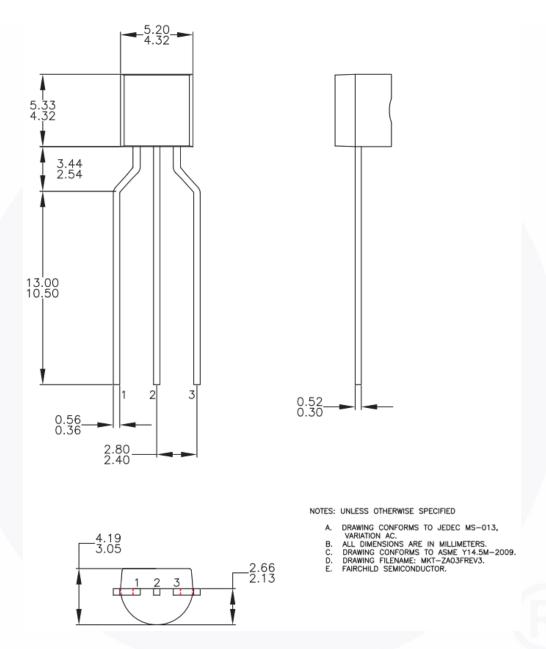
TO92, Molded, 3-Lead, 0.200 In Line Spacing LD Form (J61Z Option)
